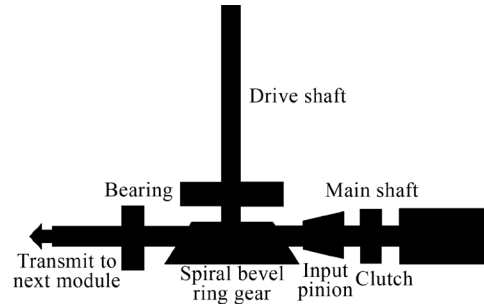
Machine elements involved in the core design of the DMF magnetic rotator
